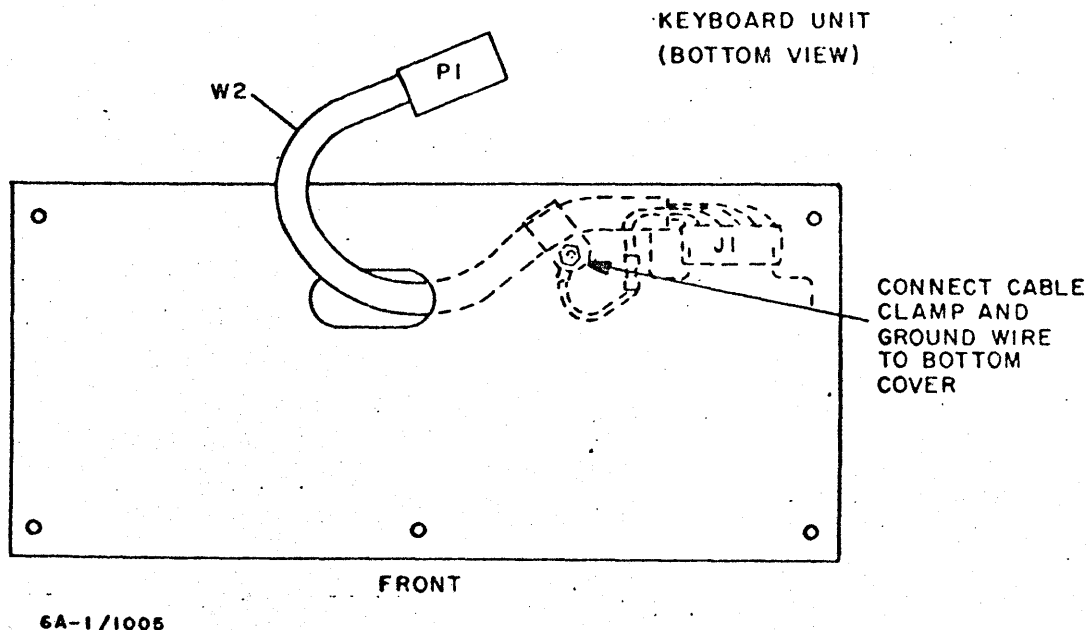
KEYBOARD CABLING WITHOUT KEYPAD OPTION
